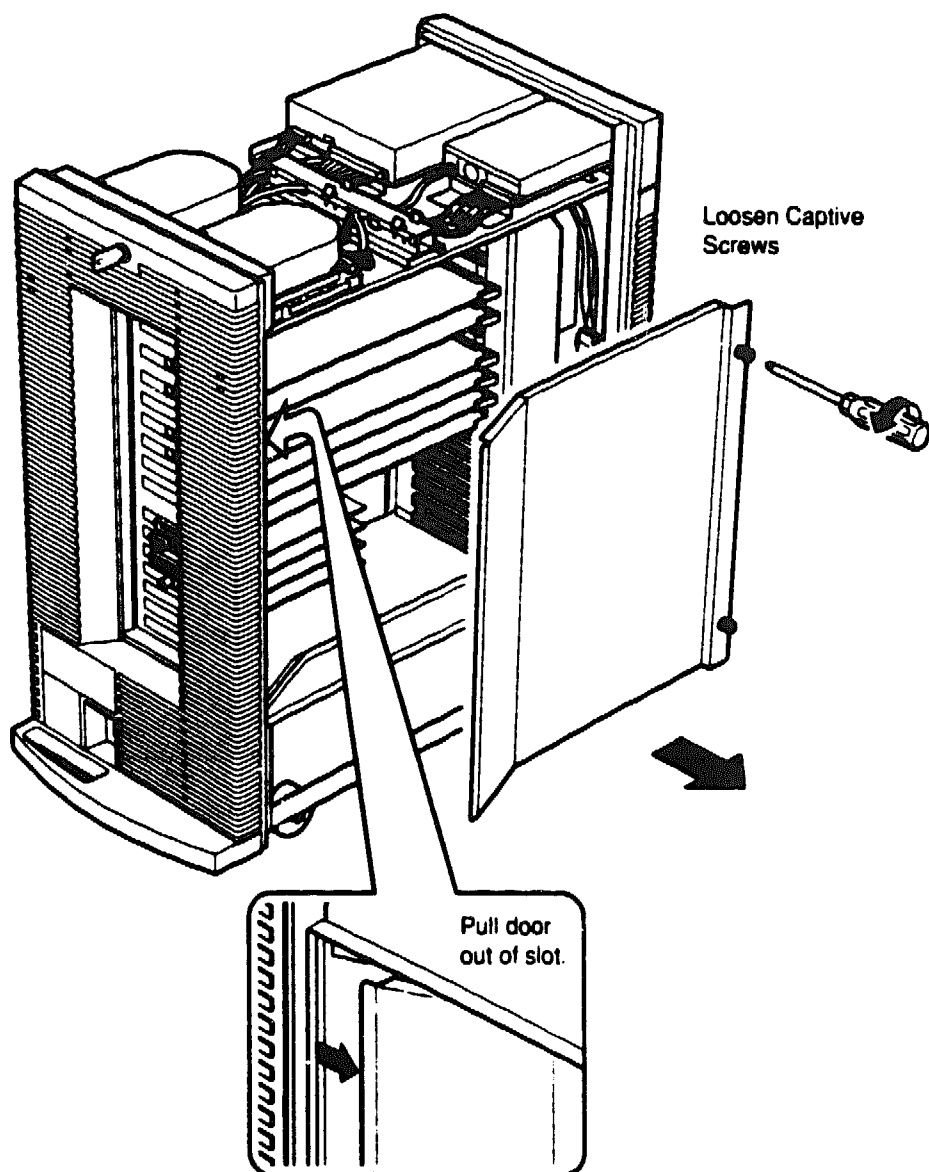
shows how to remove the card cage door to gain access to the backplane. The steps are:
